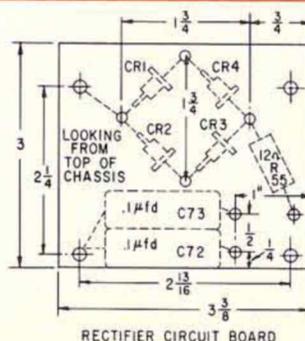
ASSEMBLY of the rectifier circuit board, looking from top of chassis. Mounting holes in corners should match the mounting bolt locations on the power transformer.
